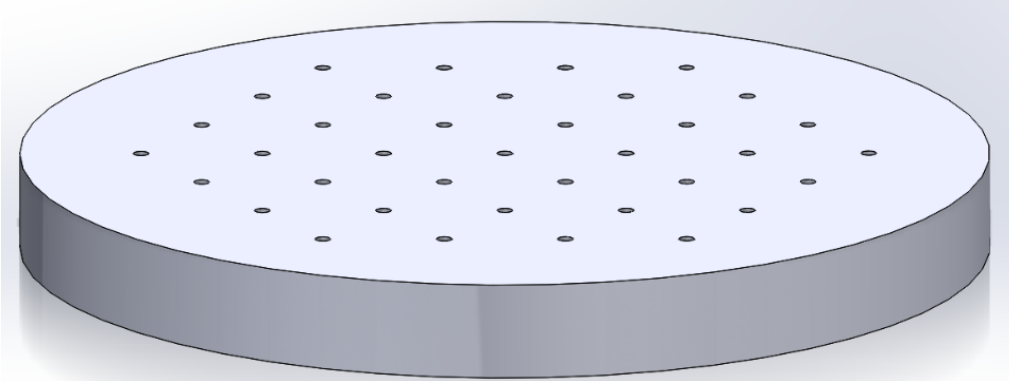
MIMO - Infill AMM Panel - CAD
